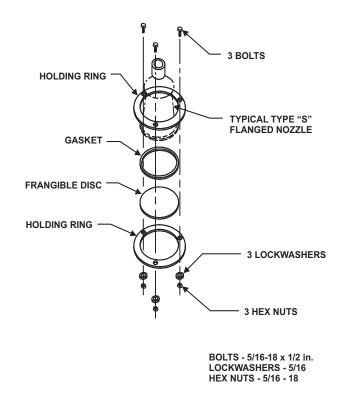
Flanged Nozzle Mounting Kit (Orifice Protection Only)
